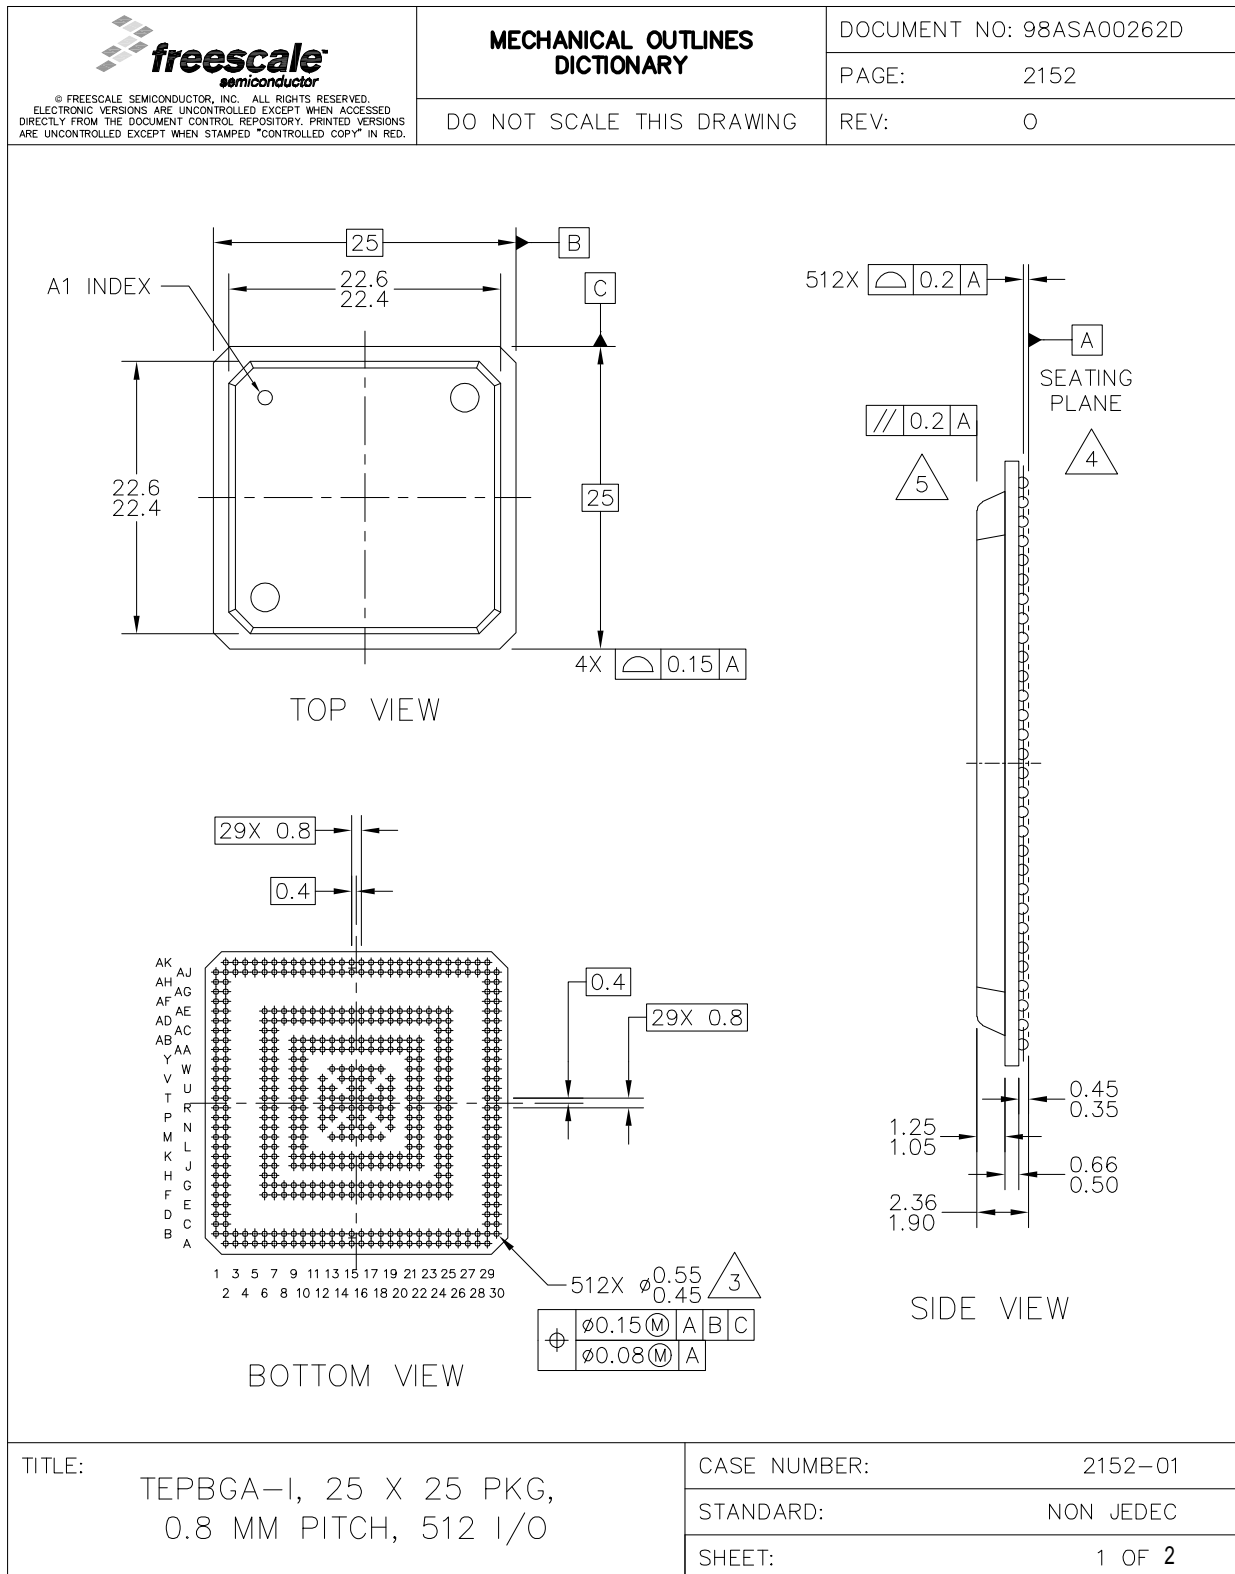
512 TEPBGA package mechanical drawing (Sheet 1 of 2)
